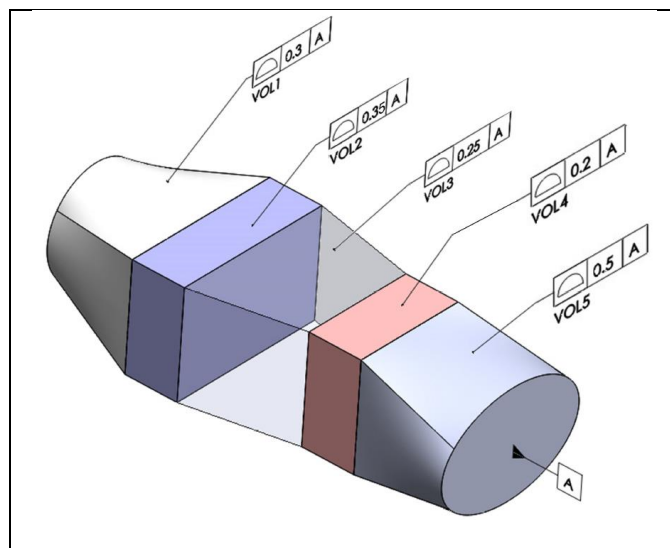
An example of the use of profile tolerancing for an additively manufactured part [9].
